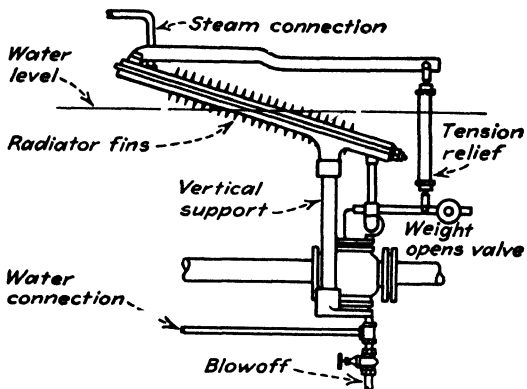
Radiating fins attached to the water end of thermostatic tube accelerate cooling. (Courtesy of Henszey Co.)
